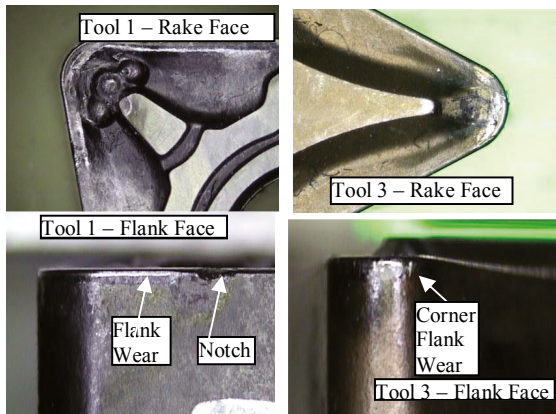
Crater and Flank wear for Tools 1 and 3 in Op 10 for Input gear.
